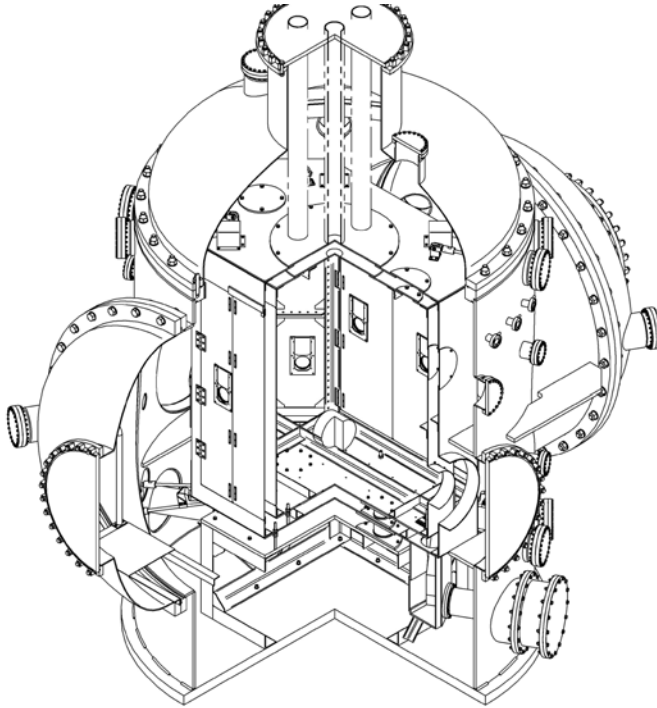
A sketch of the cryostat and radiation shields. The direction of the main beam is supposed to be from the right bottom to the left top on the figure. A test mass is shown in the inner shield. Detail of cryopayload is not shown. Drawing: TOSHIBA
